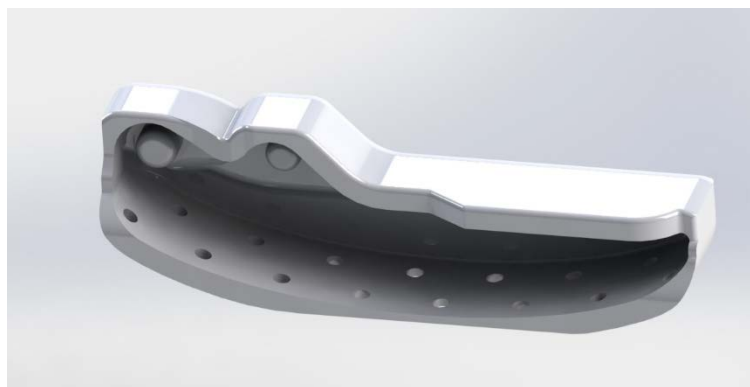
Intended jig to create the holes for the pressure sensors in the outer mold.
